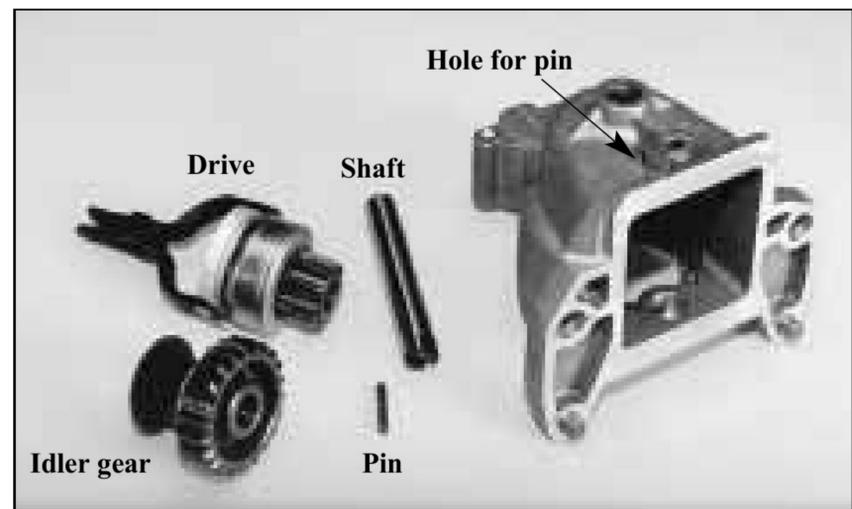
Side-mounted PMGR starters are a little tricky to disassemble.
